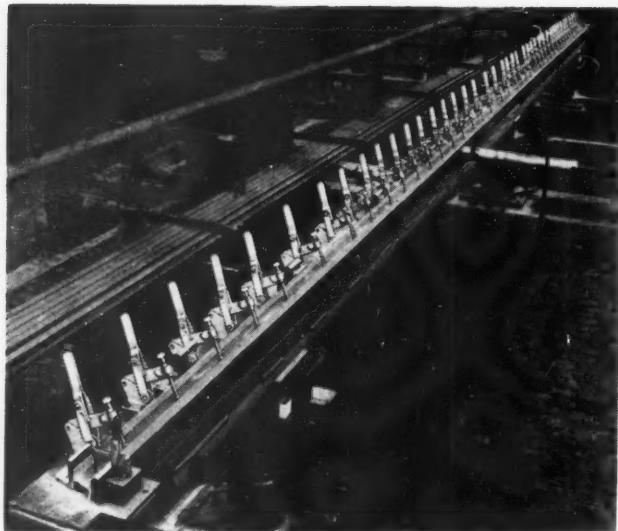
Illustration showing manner in which De-STA-Co toggle clamps are utilized at Kaiser-Frazer Willow Run plant to hold monorail drill jig
